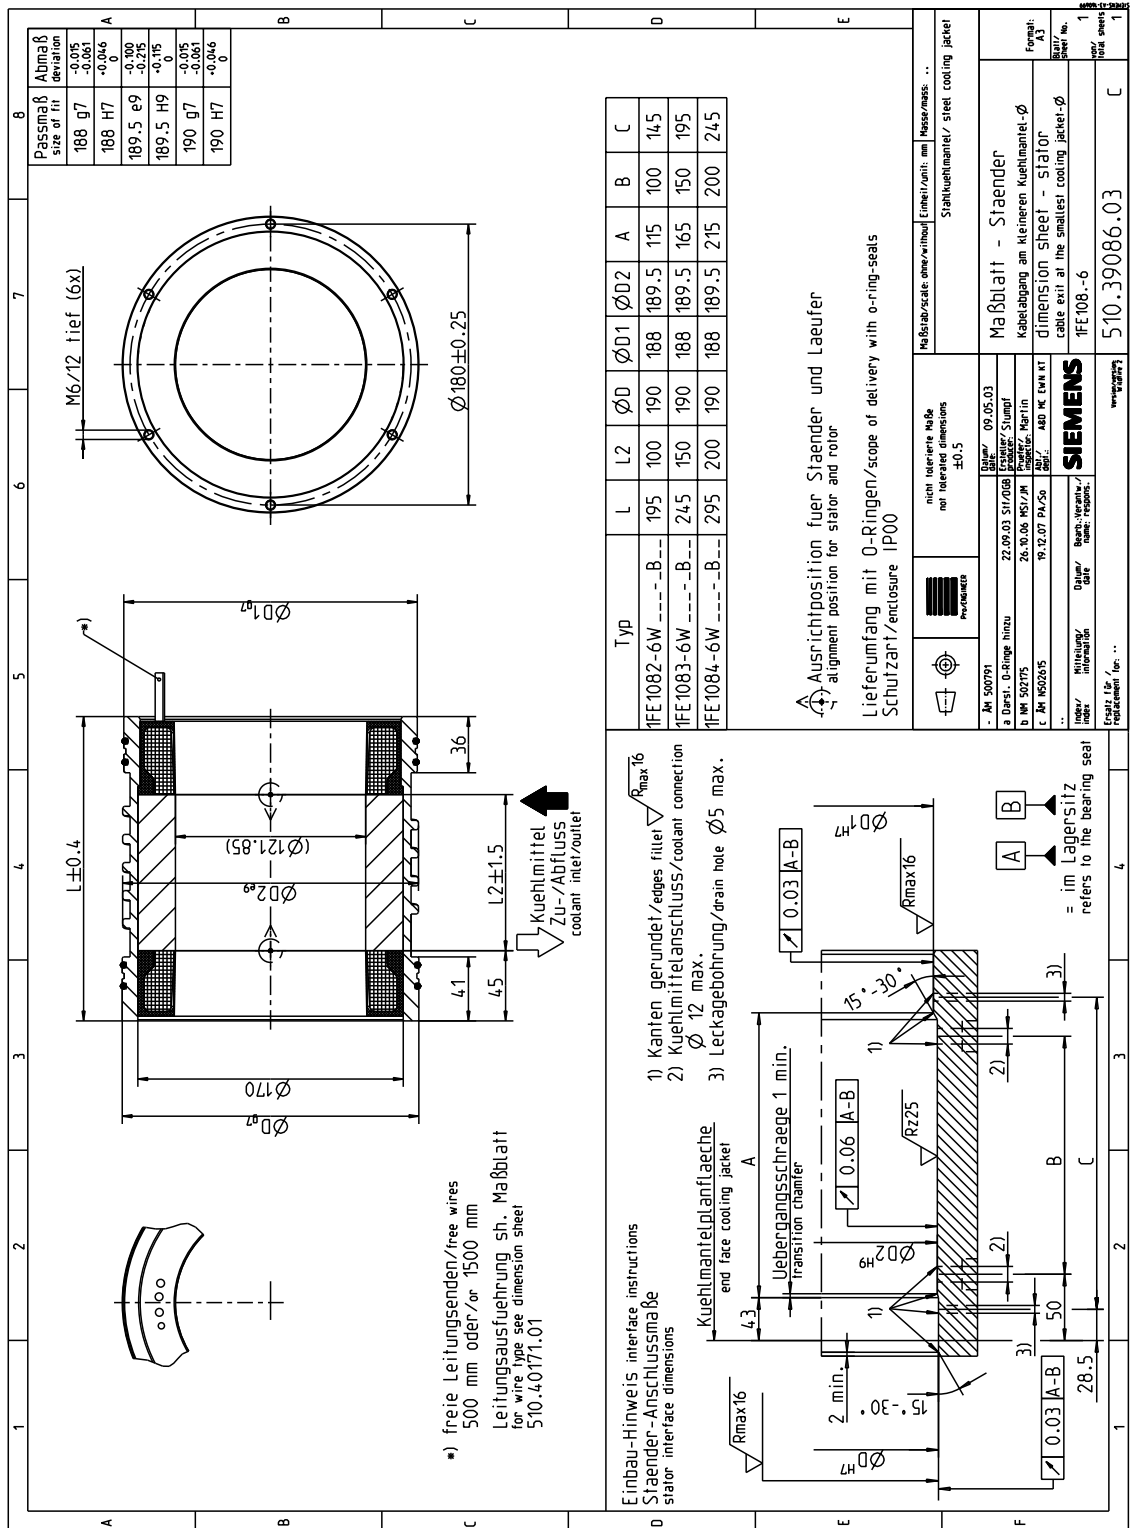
1FE108□-6, stator with cooling jacket, cable outlet at the smaller cooling jacket diameter
